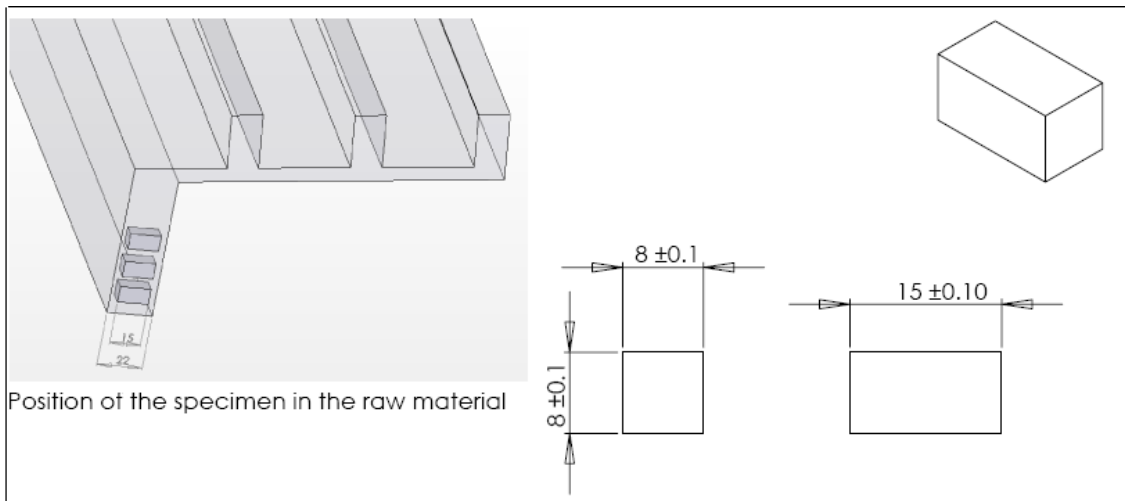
Extrusion Piece (left) and Compression Test Specimen, AZ31, THD
